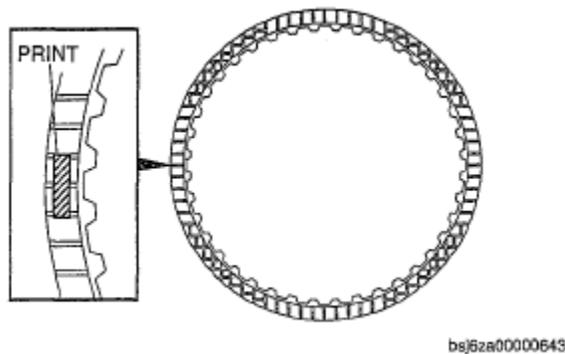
Identifying Print Mark On Drive Plates (C3)
